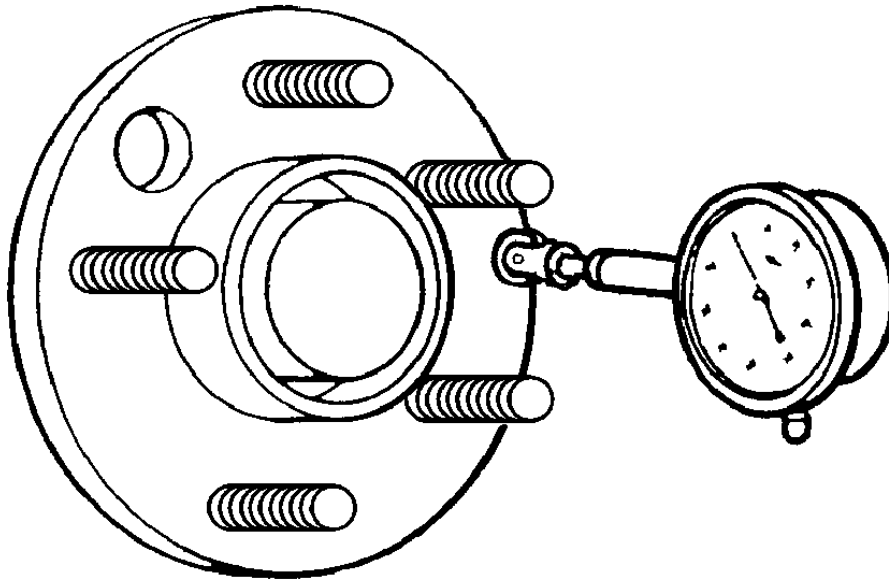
Measuring Wheel Hub/Axle Flange Runout
